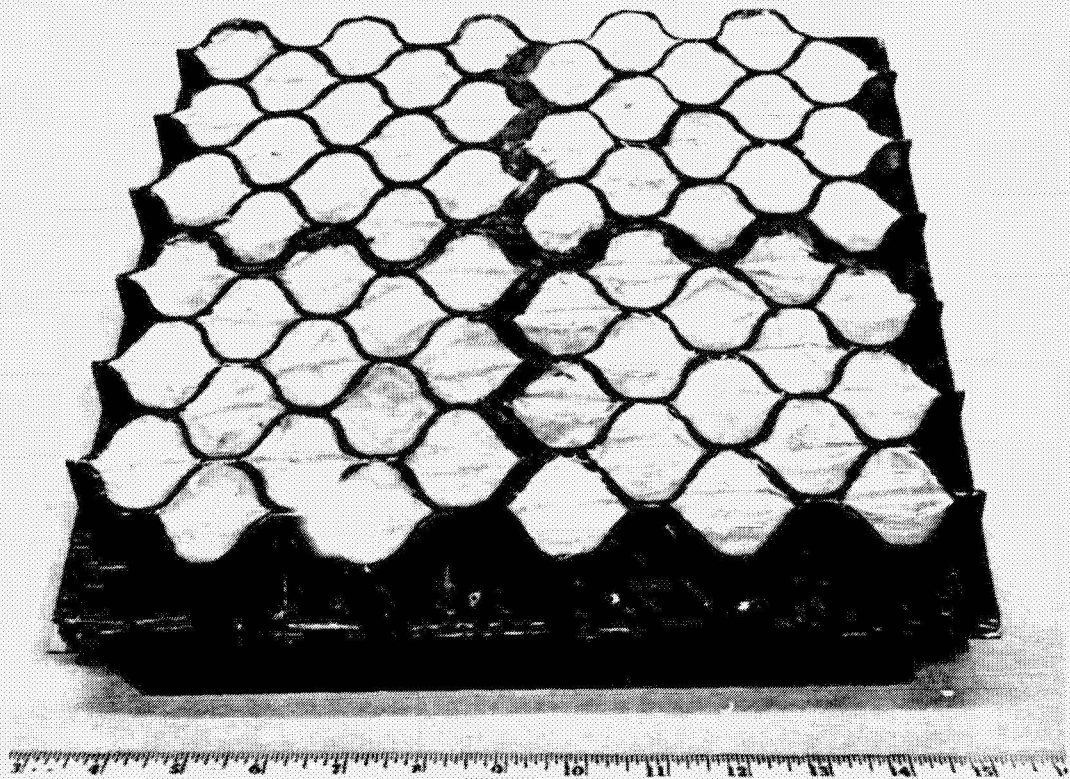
Thermal Shock Specimen Used to Evaluate Nested Grout Joint
